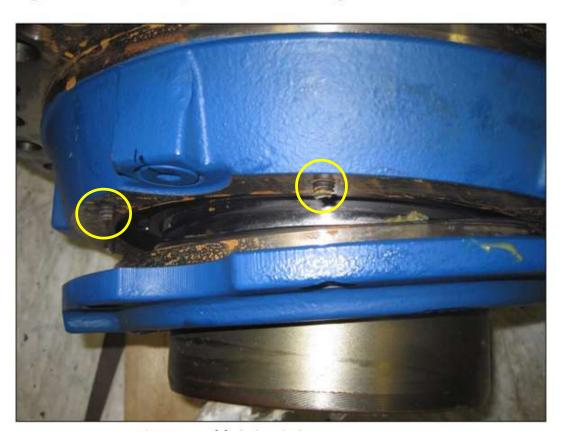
End plate separated from gearbox housing and bolts fractured (circled), [Lab report].
